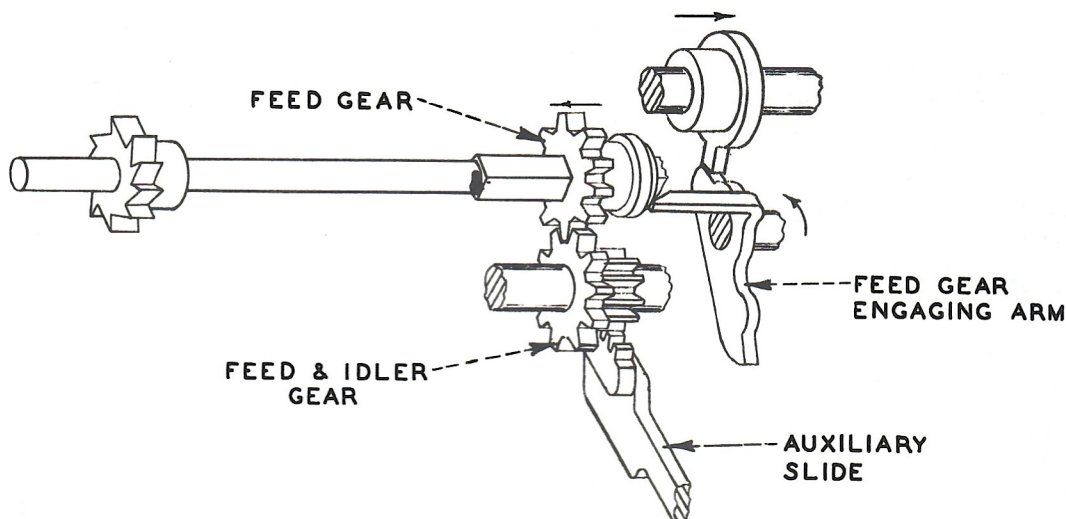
MESHING OF 10th ORDER FEED AND IDLER GEARS: When the feed gear engaging arm was actuated in FIG. 8., it meshed its feed gear with the feed and idler gear of the auxiliary slide.
